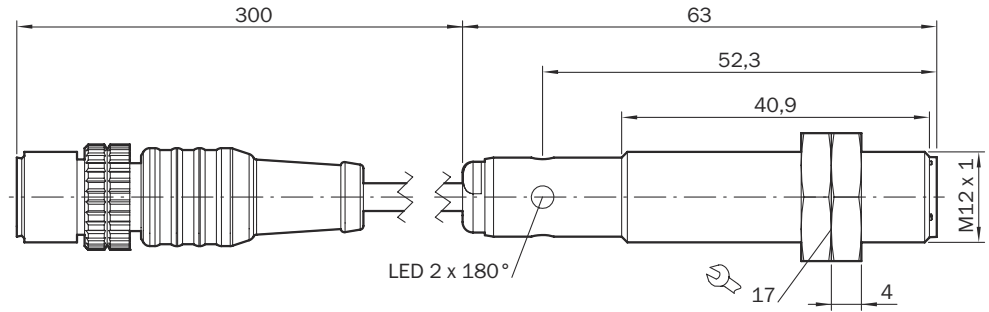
IME2S12-\*\*B\*\*Q9 dimensional drawing
